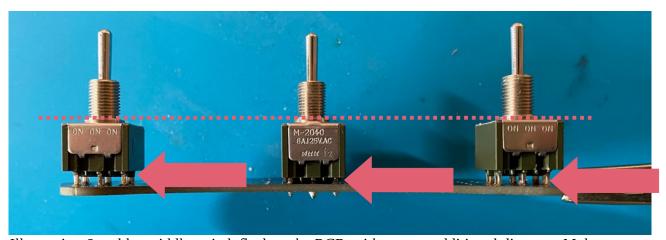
solder middle switch flush to the PCB, withput any additional distance. Make sure the switches point up straight. Ideally the top surfaces of the switches align
